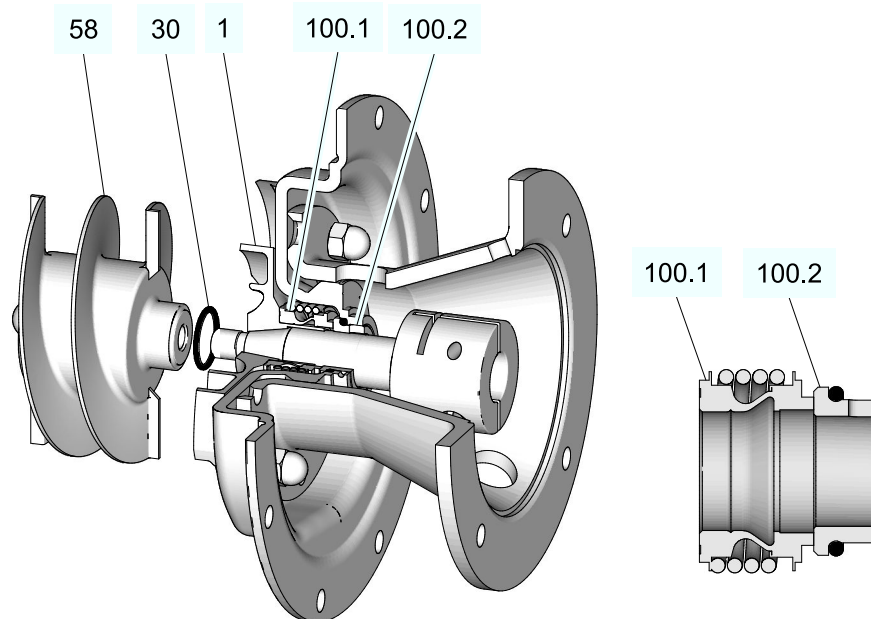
Mechanical seal EW-MG 1 with detail drawing
